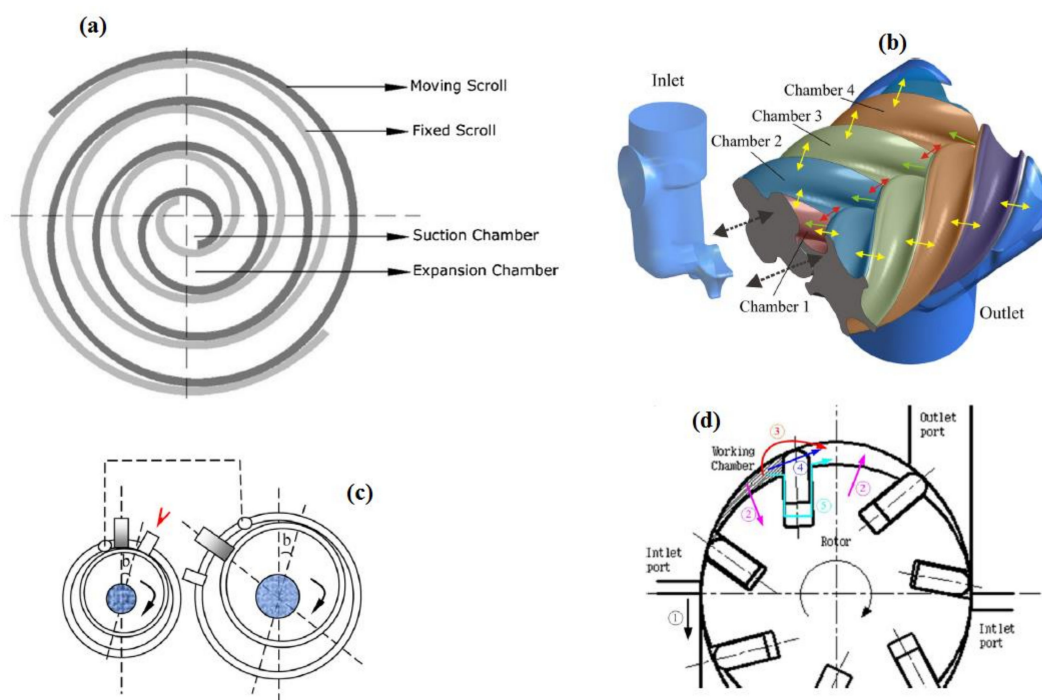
(a) Scroll expander [101]; (b) screw expander [102]; (c) piston expander [103]; and (d) rotary vane expander [104].
